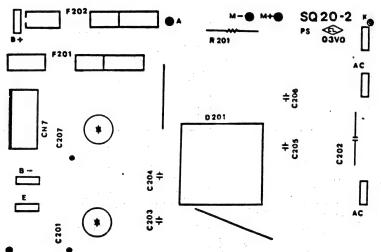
LBB 1231/1232/1233 PCB LAY-OUT PART 1
